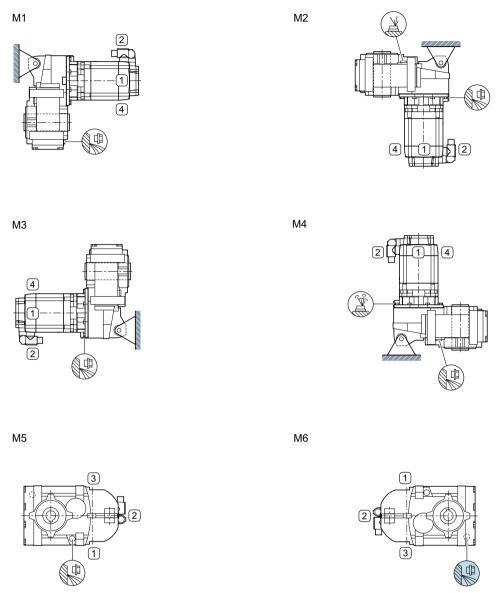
Mounting positions for servo parallel shaft geared motors FZAD and FDAD, shaft-mounted design, frame size 29, 2 stage and 3 stage
